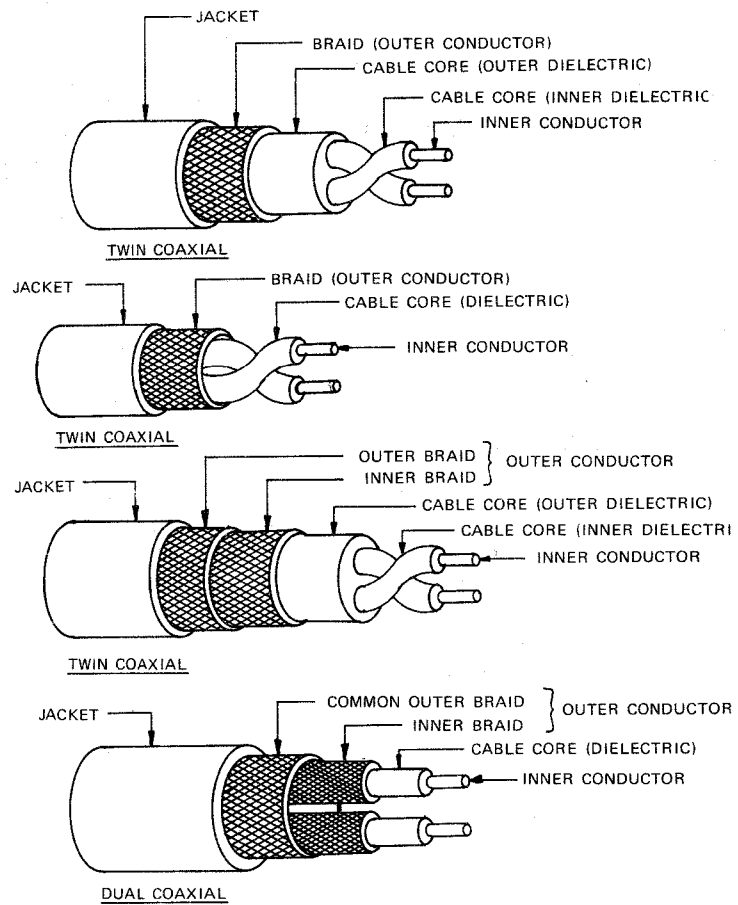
Typical Flexible Two-Conductor Coaxial Cable Construction
